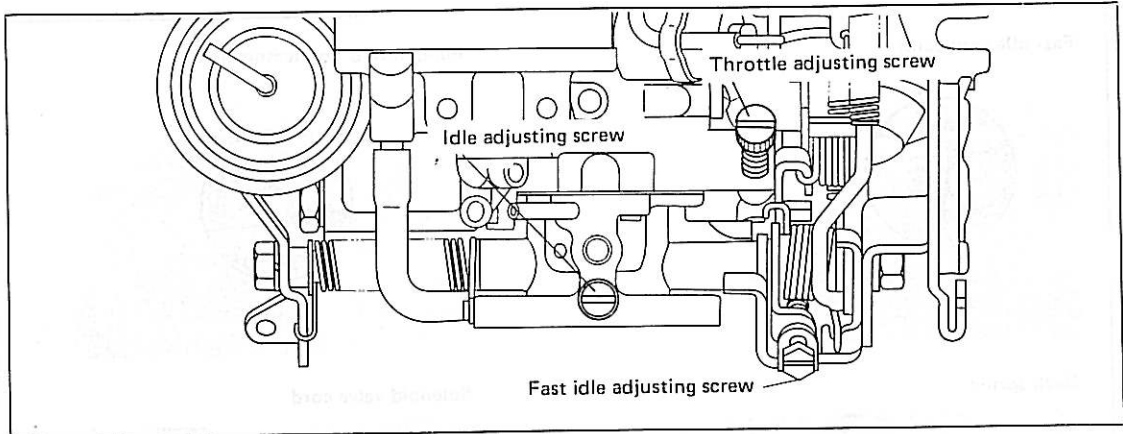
Adjustment of Idle Adjusting Screw and Throttle Adjusting Screw
